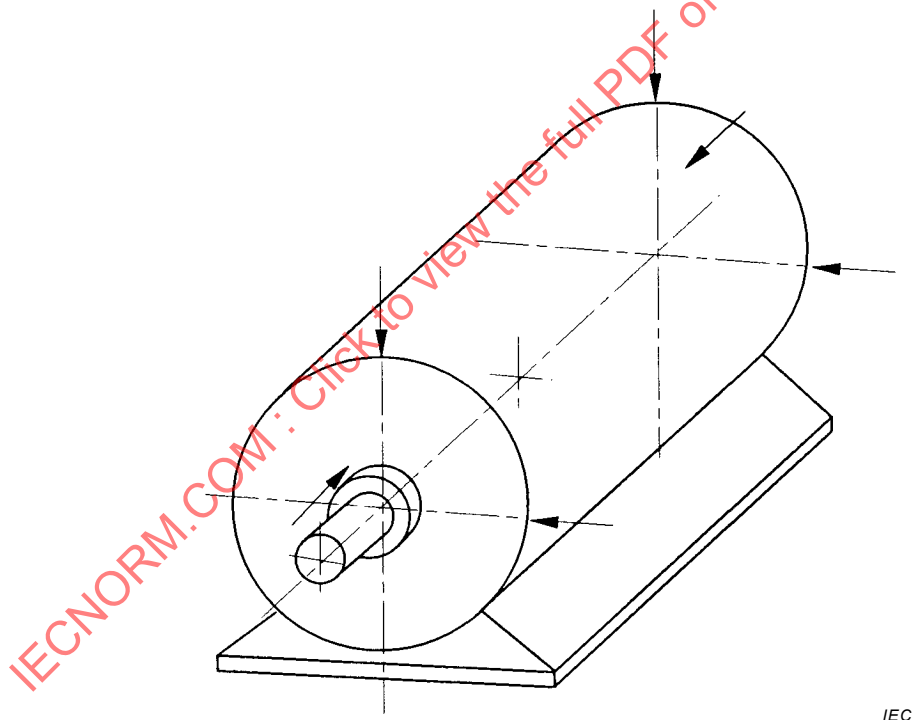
Measurement positions for those ends of machines where measurements according to Figure 2 are not possible without disassembly of parts
